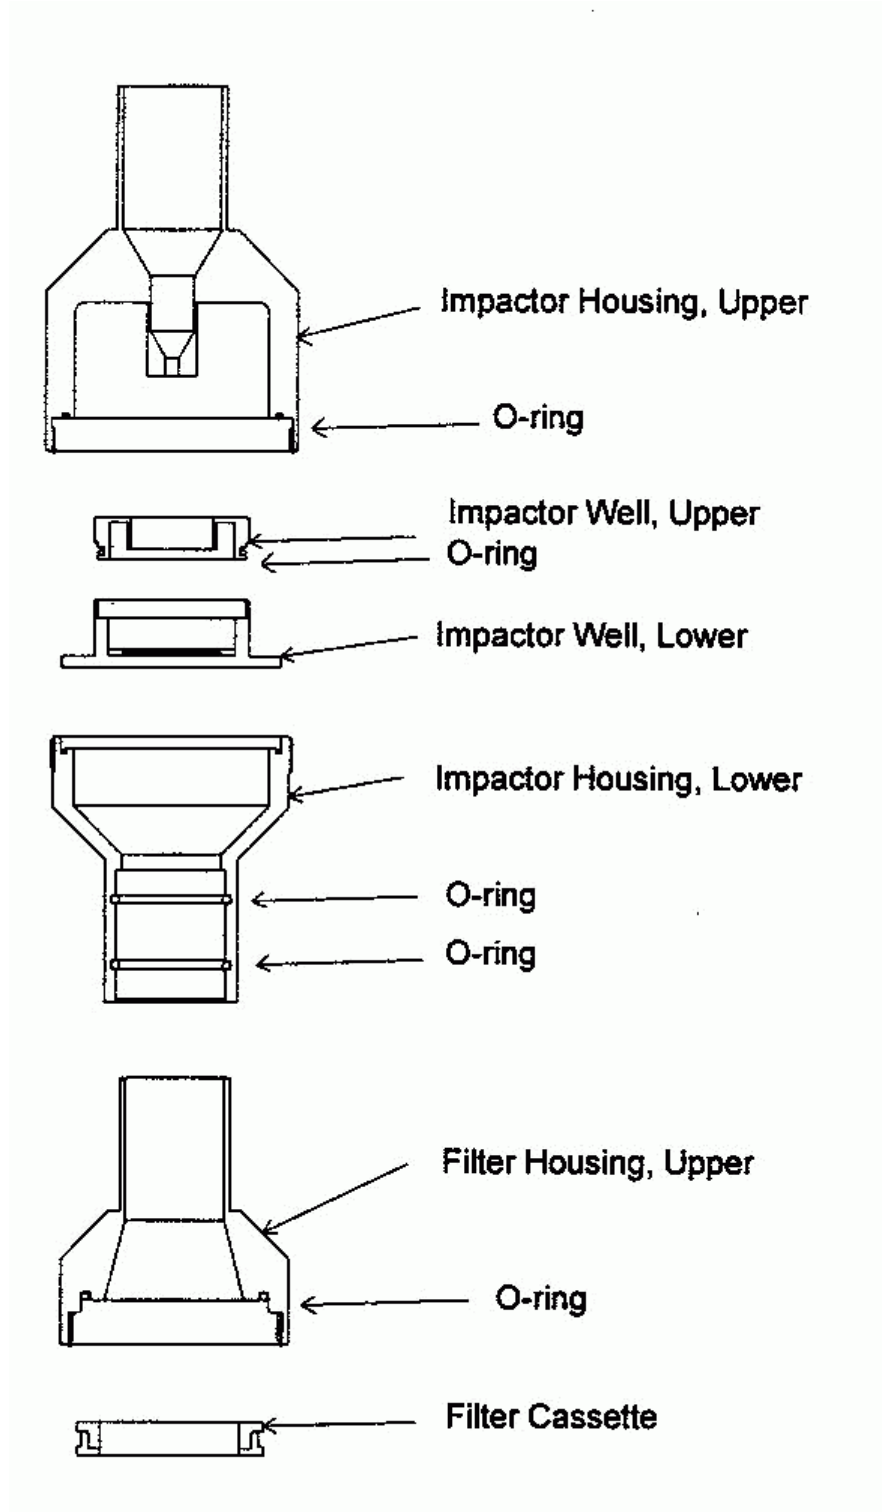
Exploded Cross-sectional View of PM_{2.5} Impactor Well and Filter Holder
